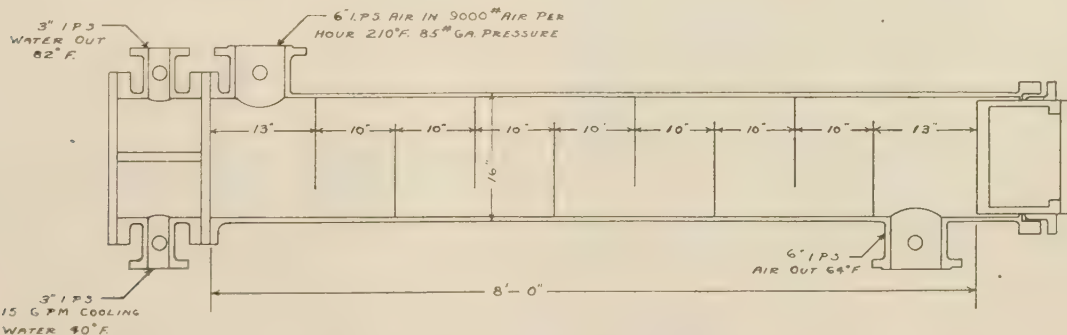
TEST AIR AFTERCOOLER WITH FINNED-TUBE BUNDLE
